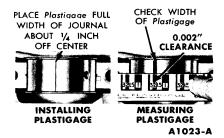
Installing and Measuring Plastigage—Engine on Work Stand
